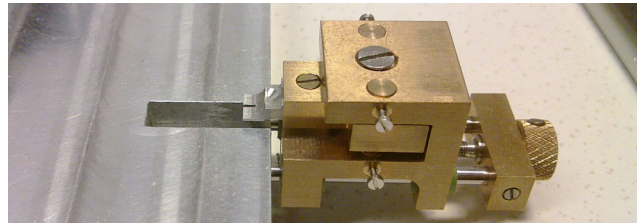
A jig to test base wire clamping and wire-to-wire bonding. (3/2009)
